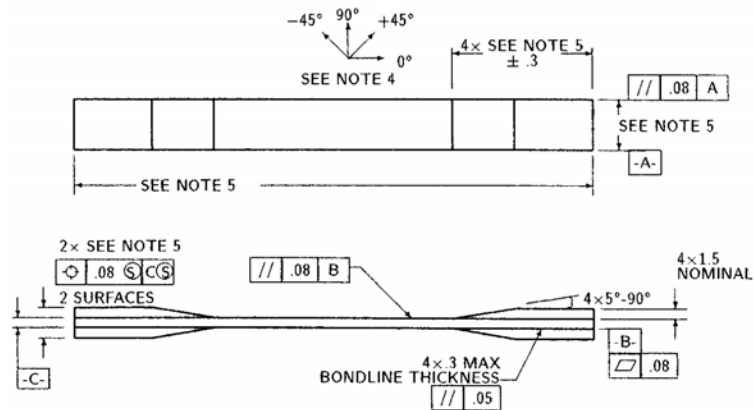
Dimensional Tolerances of Tensile Specimen [2]
